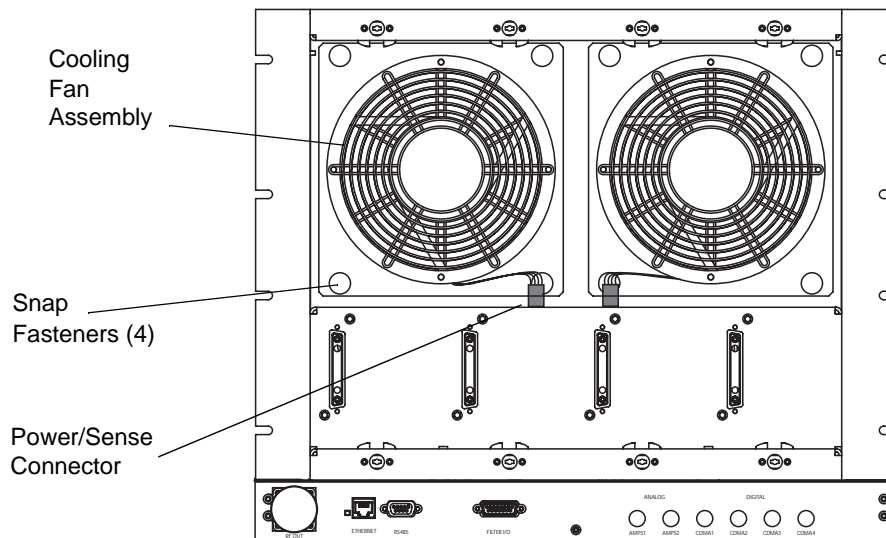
Inside Mount Cooling Fan Removal and Replacement
